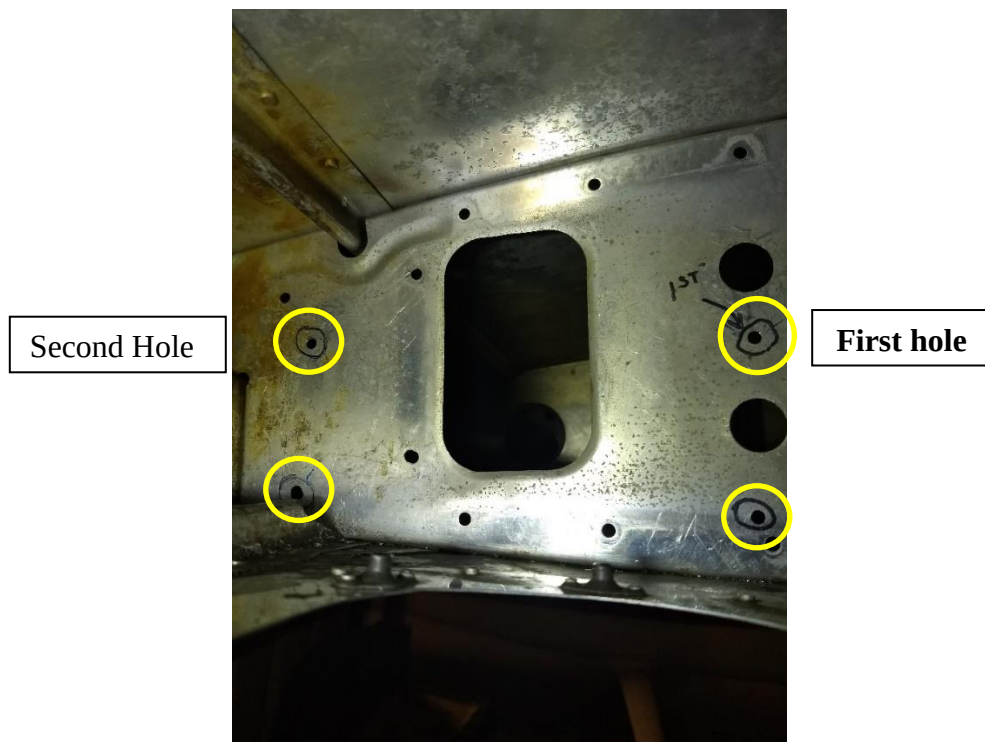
SERVO BRACKET MOUNTING HOLES (LOOKING INBOARD)
